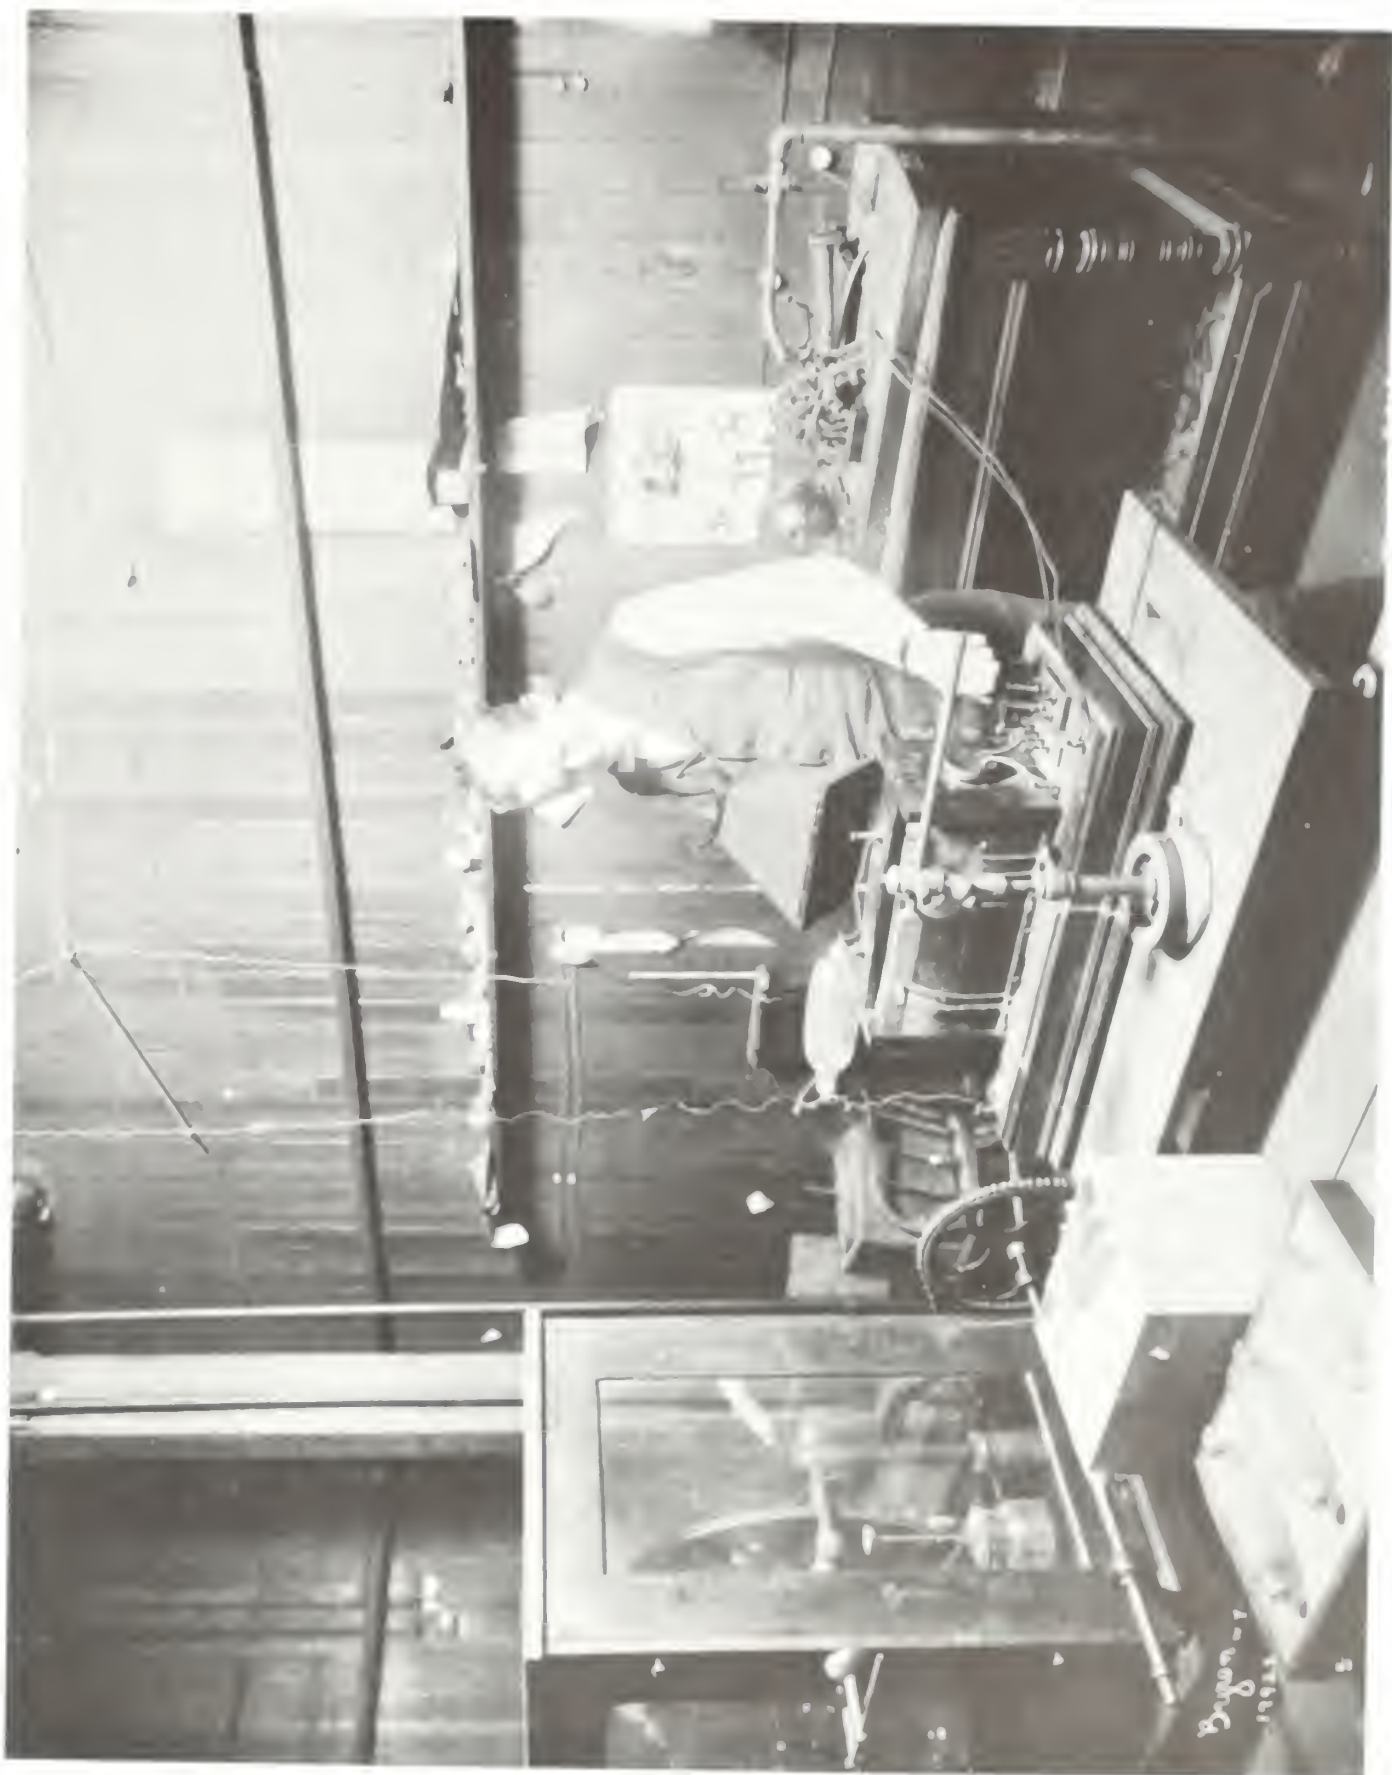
Precision machine shop, second floor, Building 5, looking toward southeast corner, September 1939. Photo no. 12.440/54, neg. no. 8050.
